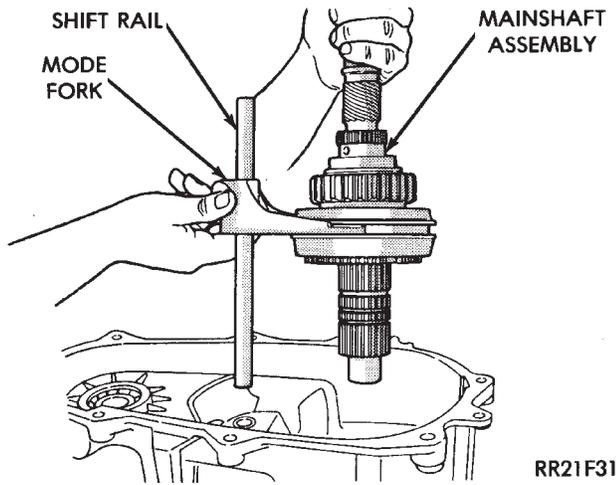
Removing Mainshaft, Mode Fork And Shift Rail
